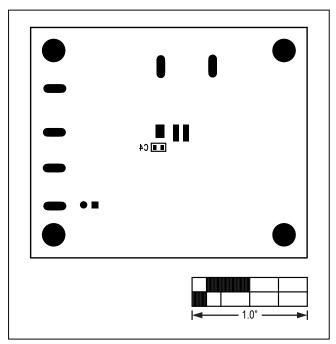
MAX17515 EV Kit PCB Layout—Bottom Silk Screen
